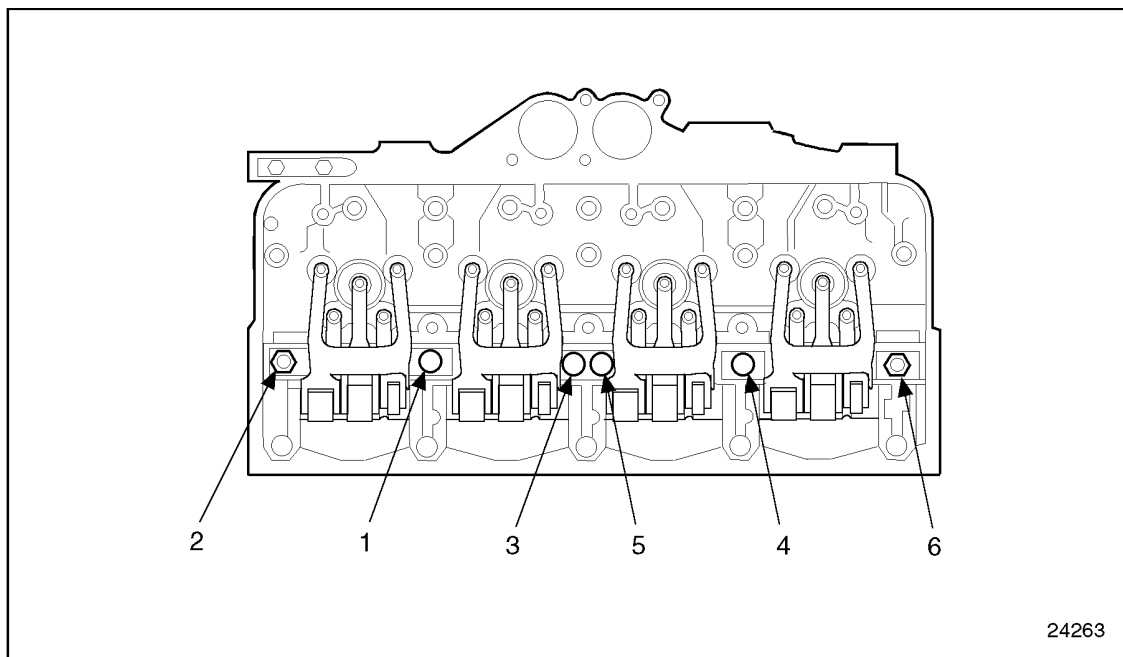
Rocker Arm Shaft Retaining Bolt and Nut Tightening Sequence
